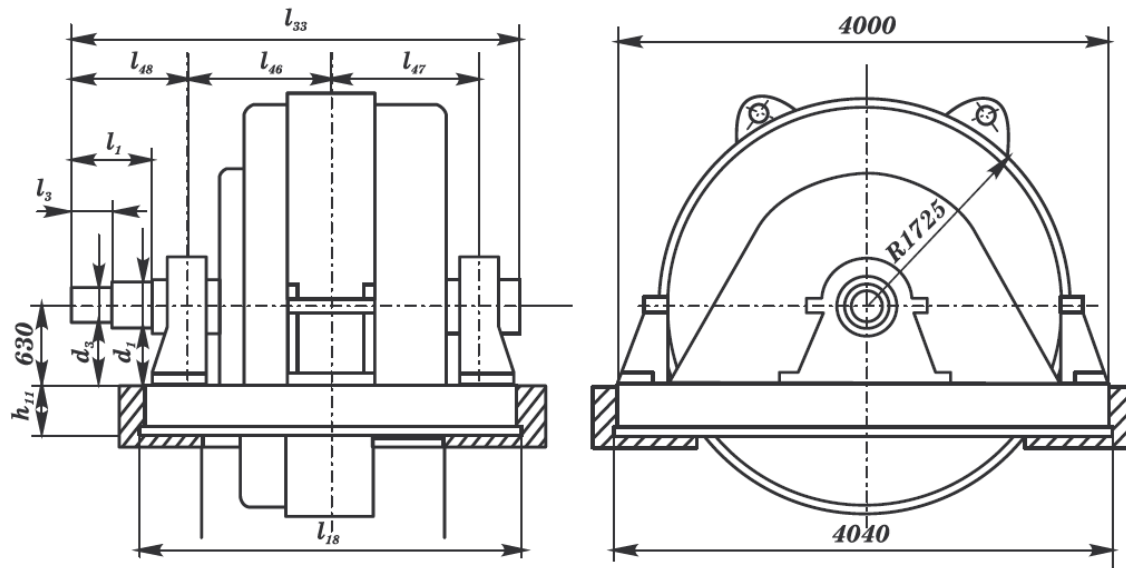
Overall and mounting dimensions and weight of motors with height of rotation axis 630 mm.
